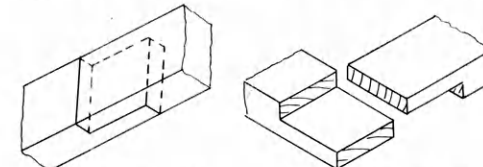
Half Lap Joint Fig. 6 End Lap Joint
